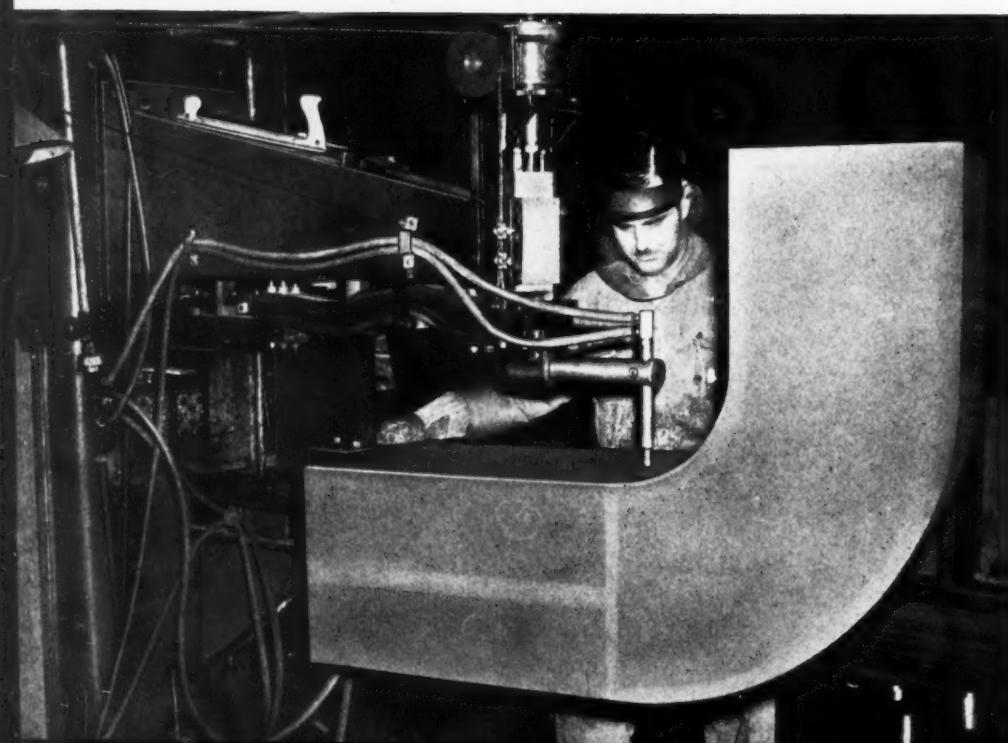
Spot-welding Operation on a Ventilator Duct being Performed by a Machine of Special Design
